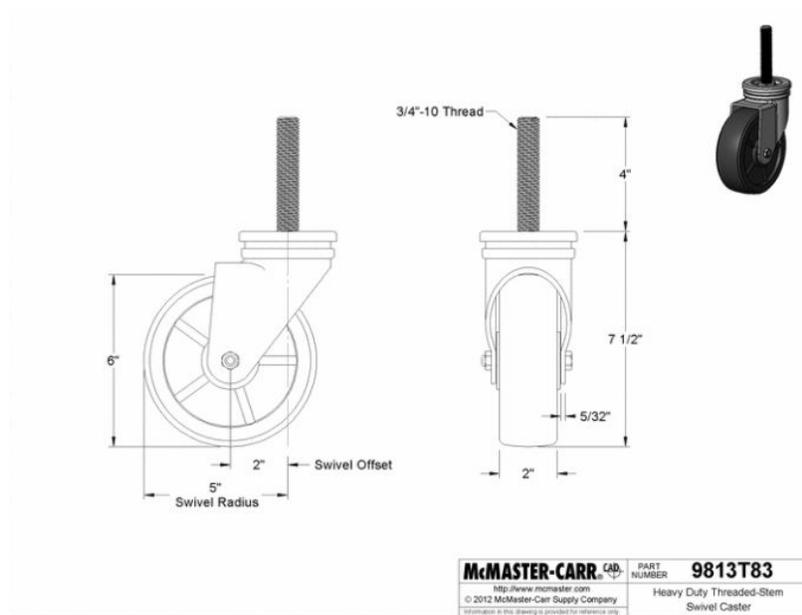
McMaster Carr Solidworks Drawing for Heavy Duty Threaded Extended Stem Caster
